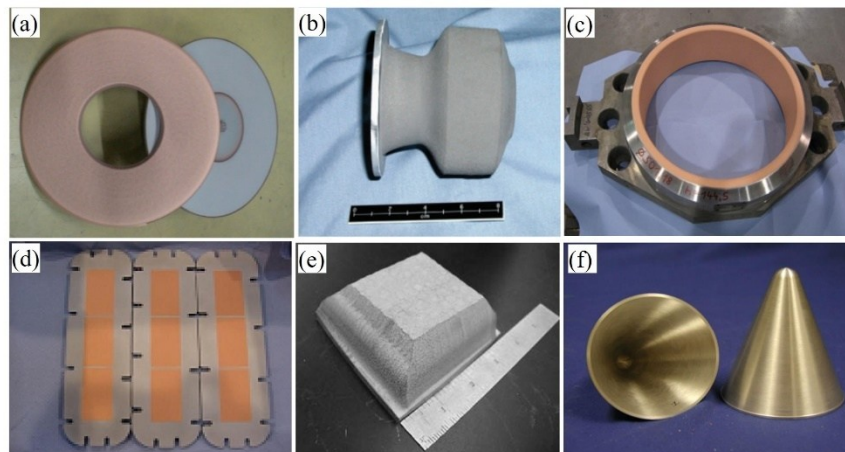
Application of cold spraying in net-shape forming: (a) high magnetic field magnets ; (b) rapid prototyping of Ti6Al4V axisymmetric bulk part [79]; (c) thick copper coating inside a pressure ring for food processing machine [82]; (d) electronic heat sinks [82]; (e) bulk Ni/Al energetic material [83]; (f) Cu/W cone structure [84].
